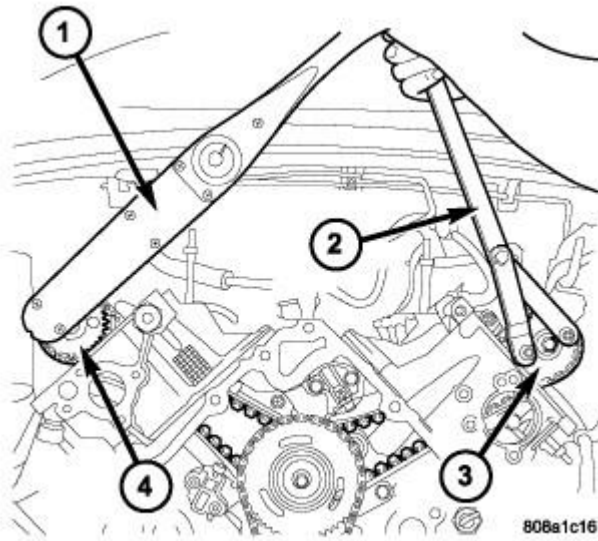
Tightening Right Side Camshaft Sprocket Bolt
